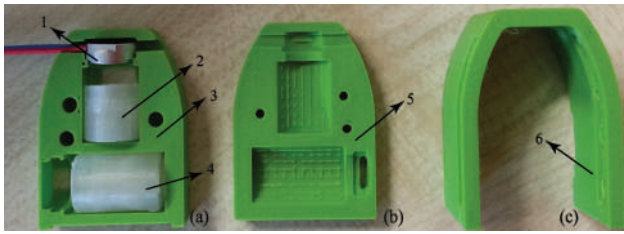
Fabrication of the lower part (a), spacer (b) and the finger nest (c) of the thimble-like device (a) The lower part of the wearable device also consists of two parts. The lower part houses the rotary encoder and the cylindrical parts in which the magnetic part is embedded. (b) The spacer of the wearable device incorporates the necessary spaces for mounting rotary encoders and force sensors. (c) The lateral sides of the top part are designed to accommodate the finger, which is designed according to the finger anthropomorphic model.
